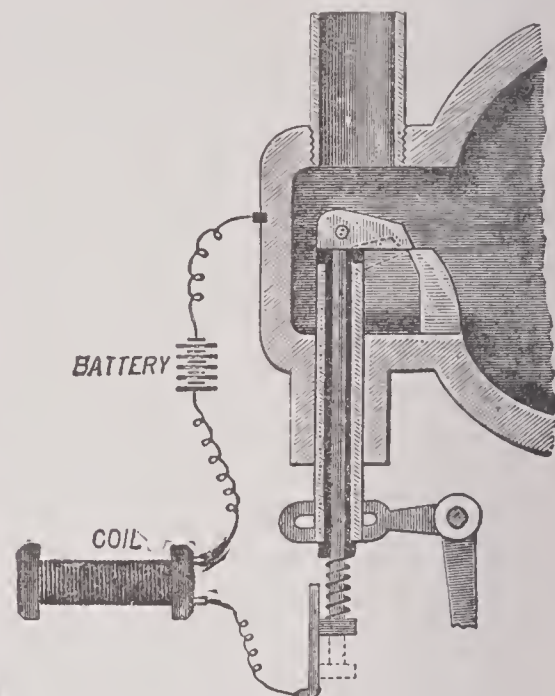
ELECTRIC IGNITER FOR GAS ENGINE—RECIPROCATING FORM.
